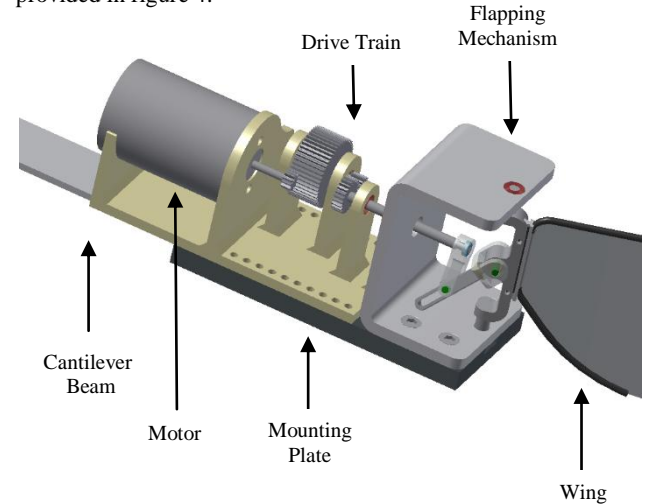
CAD model of the wing mechanism assembly on the cantilever beam. Some components are coloured or partially transparent for clarity.
